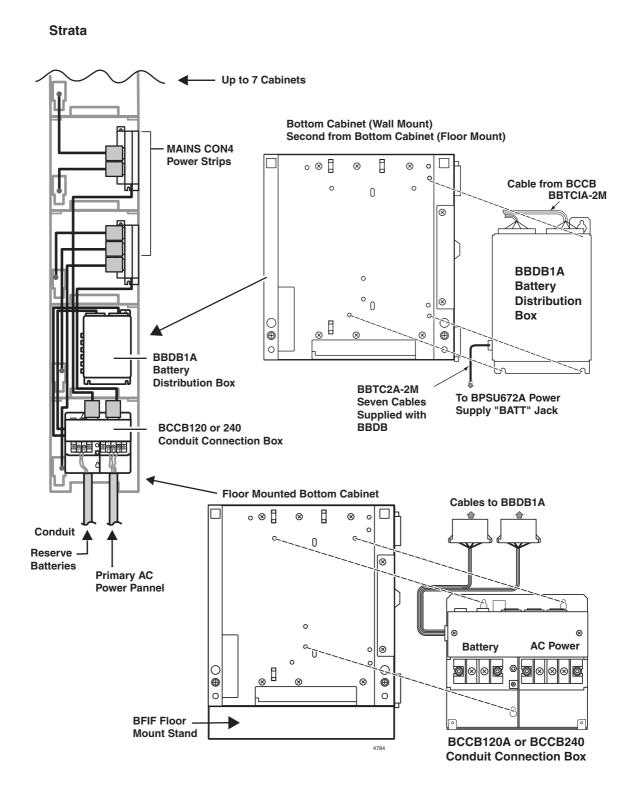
Battery Distribution and Conduit Connection Box Installation
